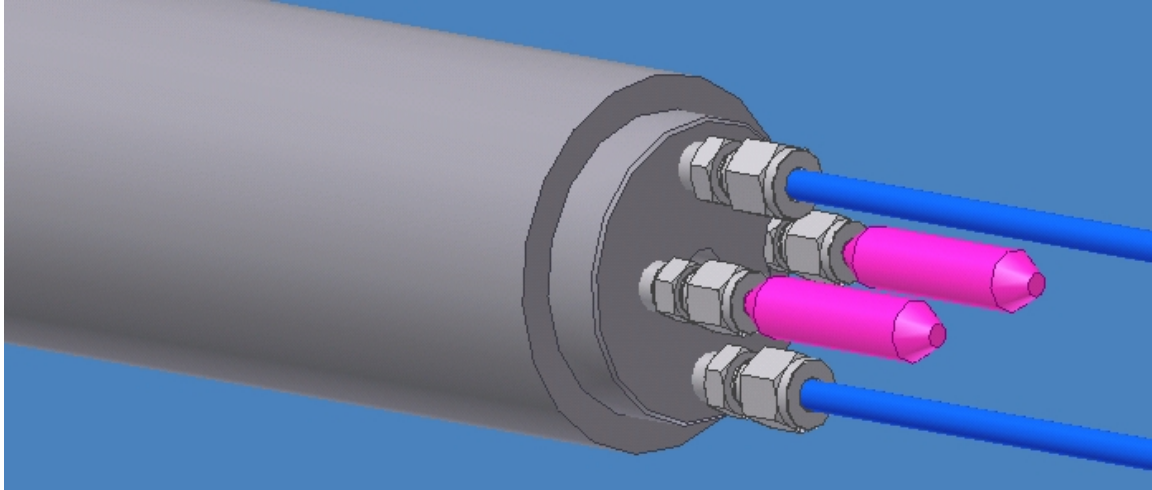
Close-up CAD Drawing of PCM End Cap and Compression Fittings
